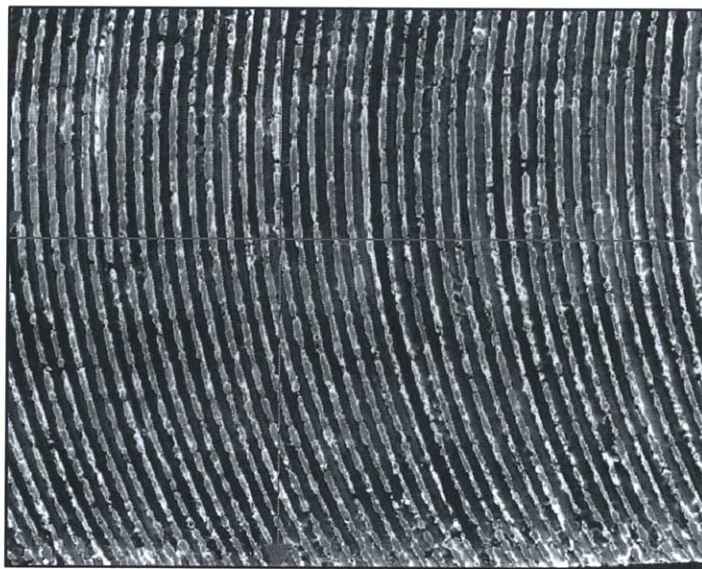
Interferometer Scan of Tool Marks on a Micro machined Tool
